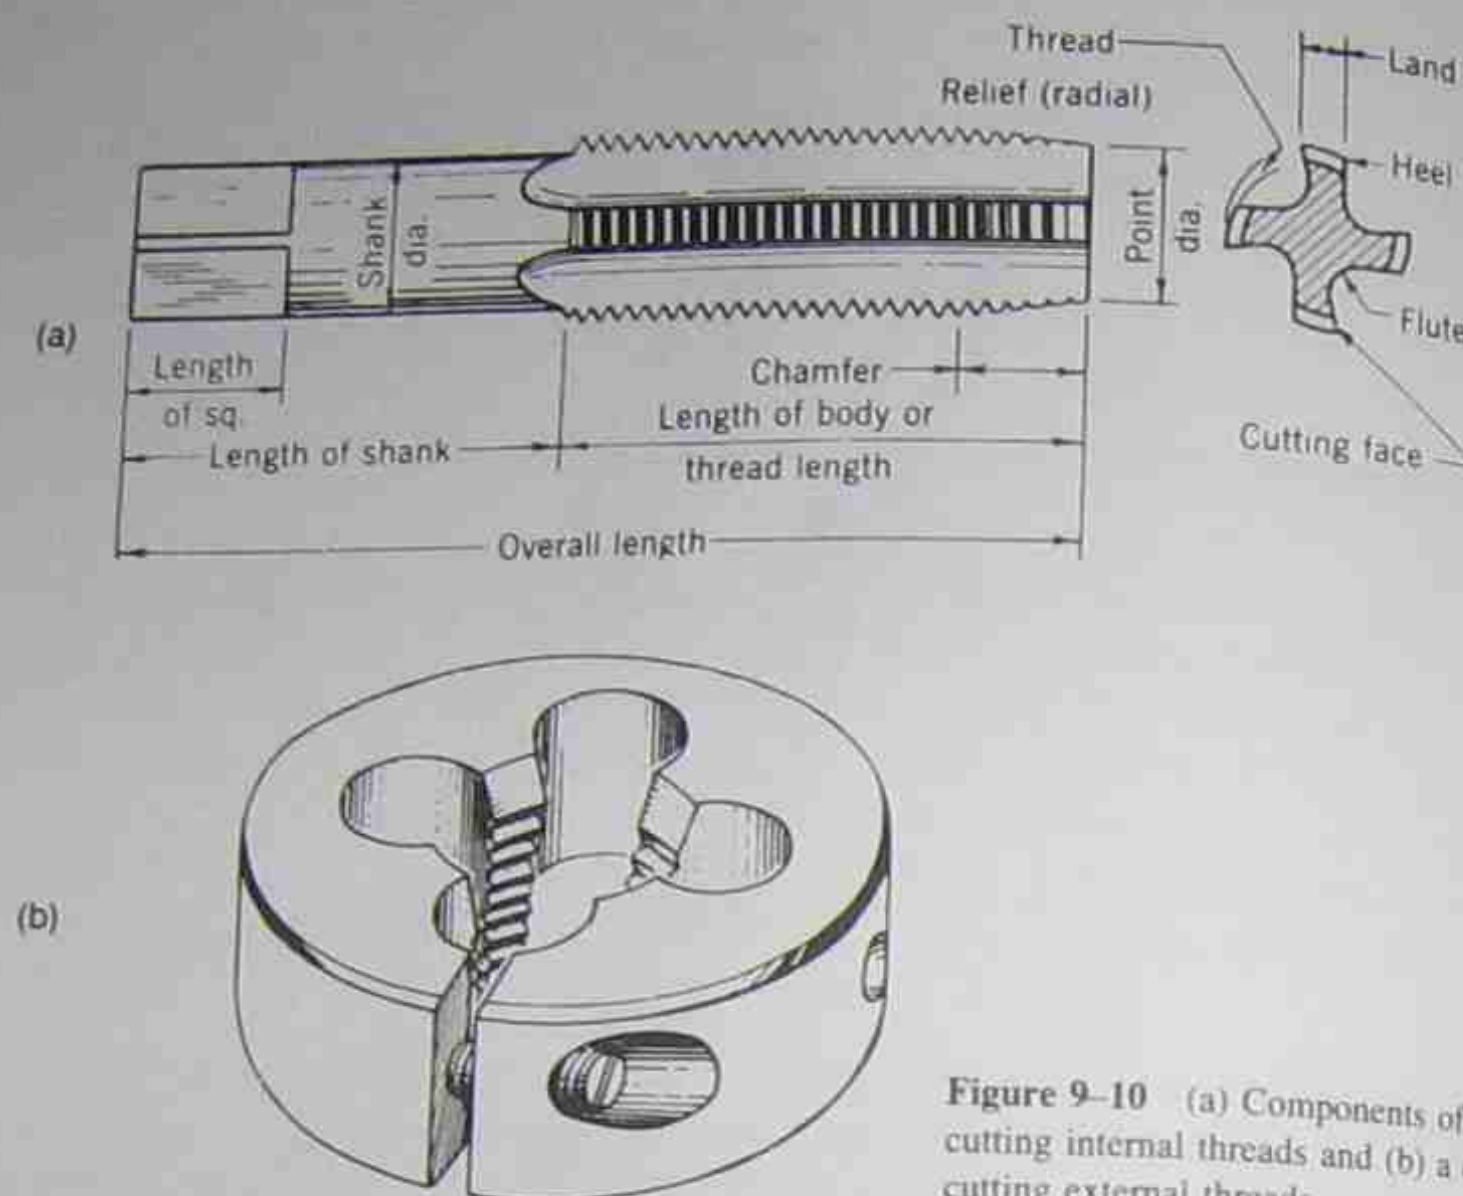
(a) Components of a tap for cutting internal threads and (b) a die for cutting external threads.
